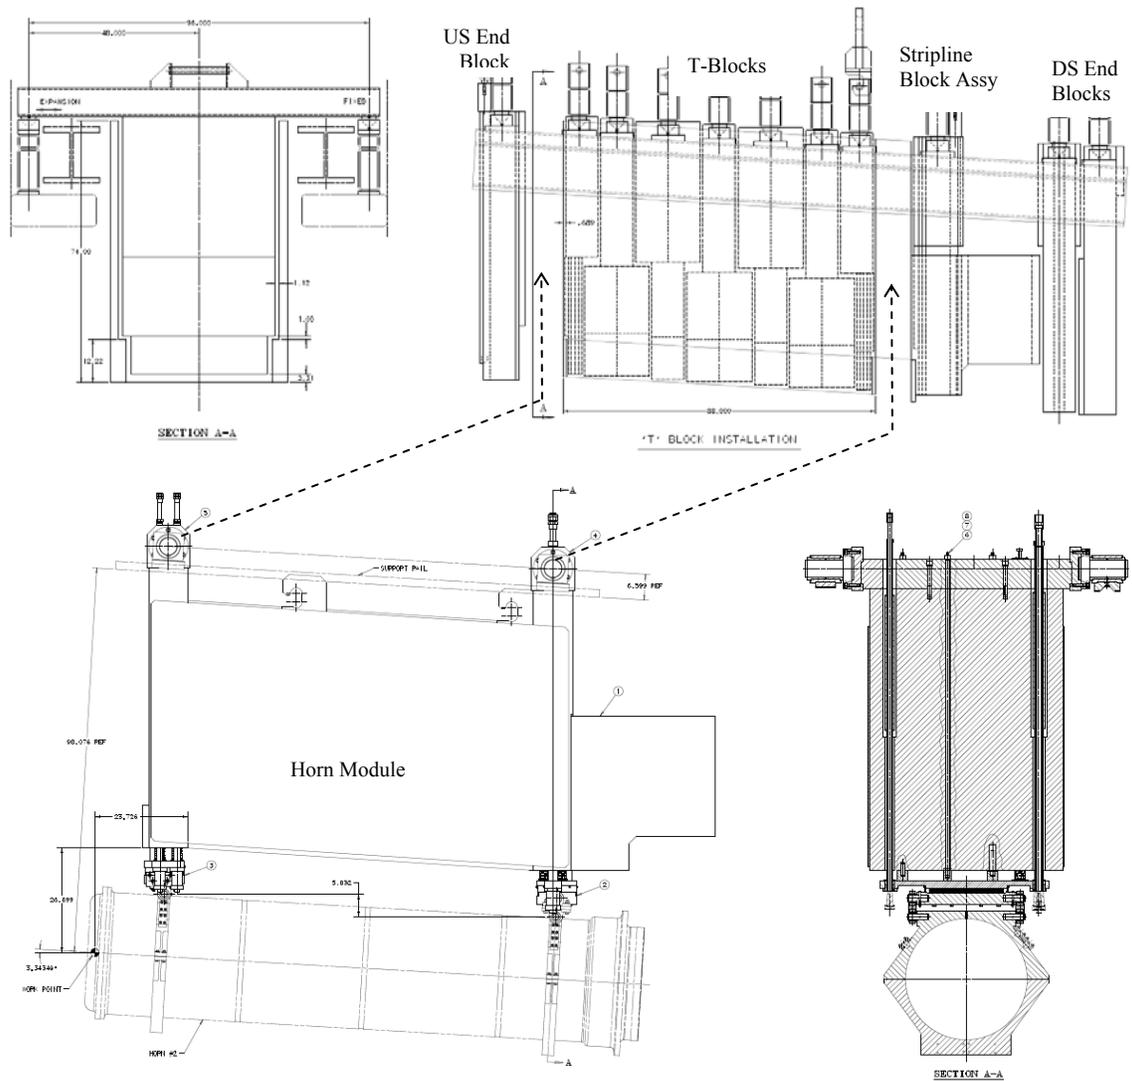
NuMI Horn module and shielding blocks (T-blocks, end blocks, & stripline block) that will be moved to the ME position together with Horn 2.
